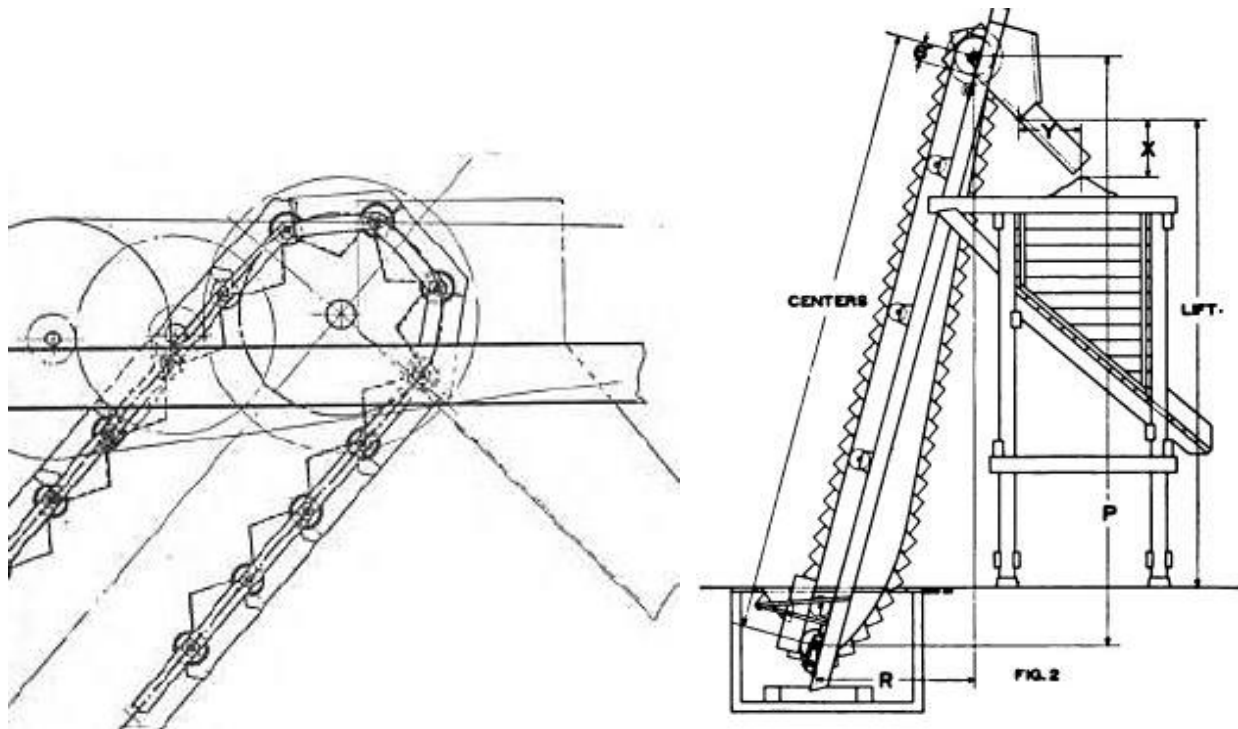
Image of the S-A Manufacturing Co.'s pan-conveyor (left) and an inclined bucket elevator design by the Jeffery Manufacturing Co. (right) (Stephens-Adamson Manufacturing Company 1913; Jeffery Manufacturing Co. 1922)
